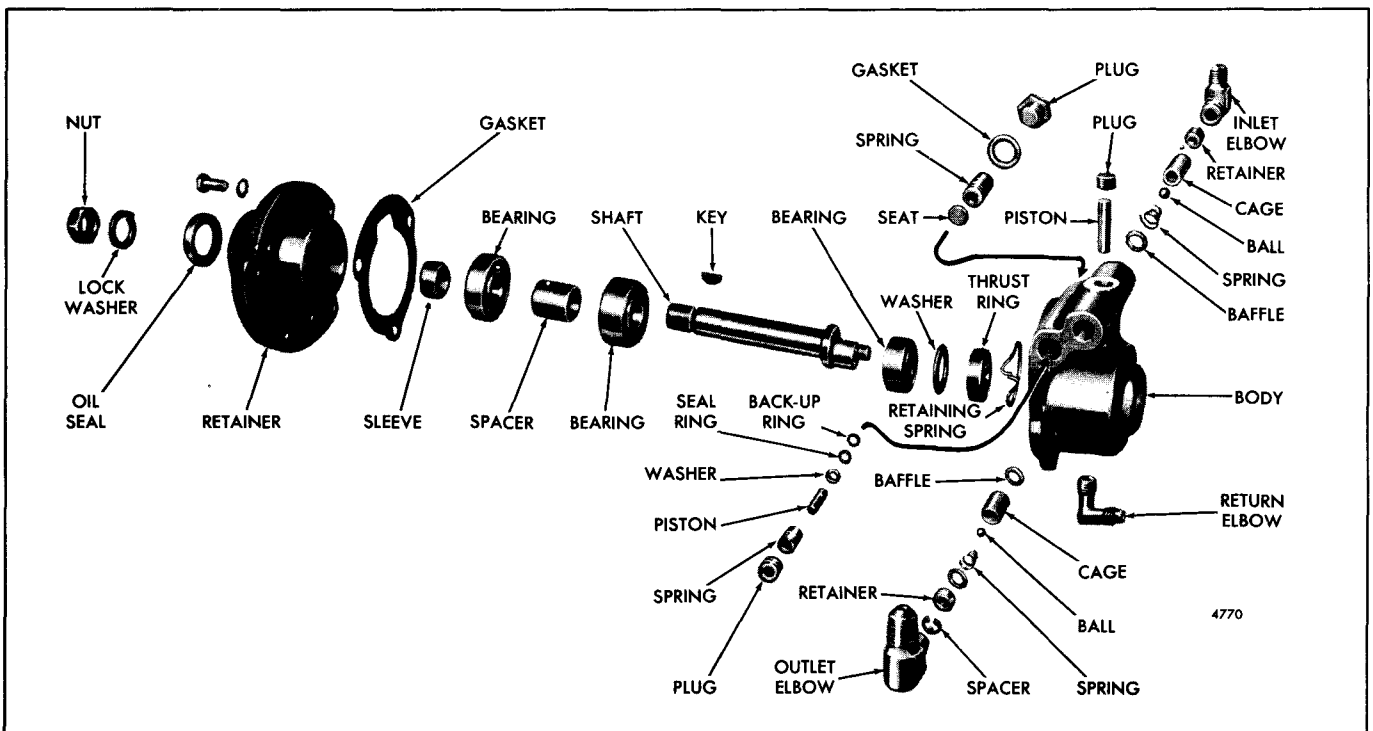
Belt-Driven Charging Pump Details and Relative Location of Parts
